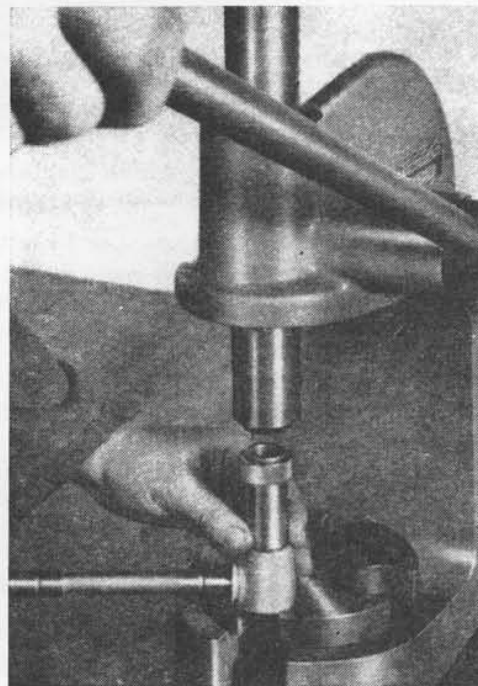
/1 - Pressing-in of King Pin Resilient Bush Using MP 6-112 Mandrel
